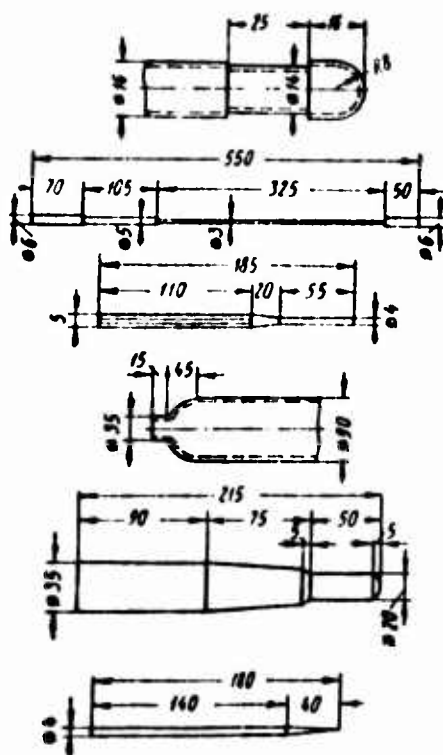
Examples of forgings, obtained on rotary-forging machines.
